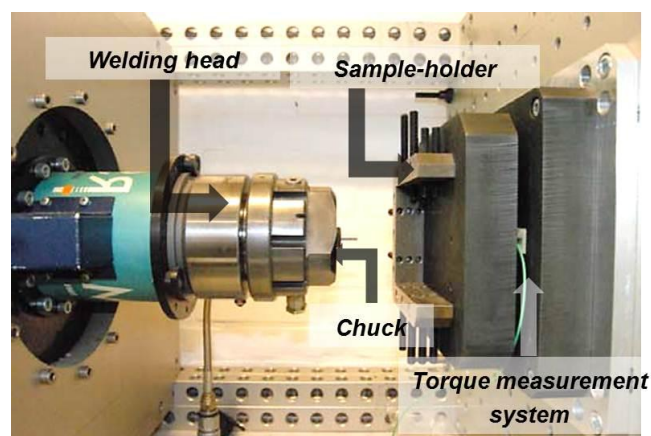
2 RSM400 welding system used for FricRiveting.
